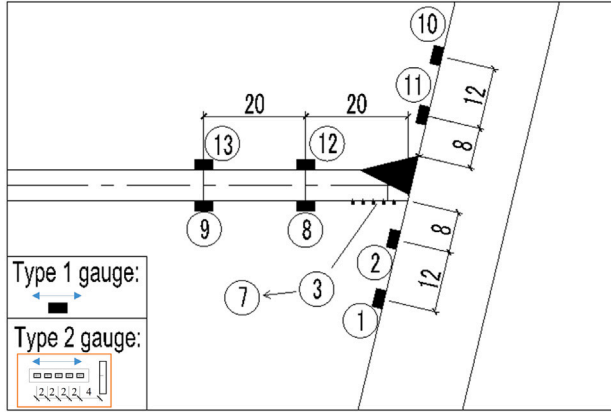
Arrangement of strain gauges at the centre of the specimen (unit: mm).
